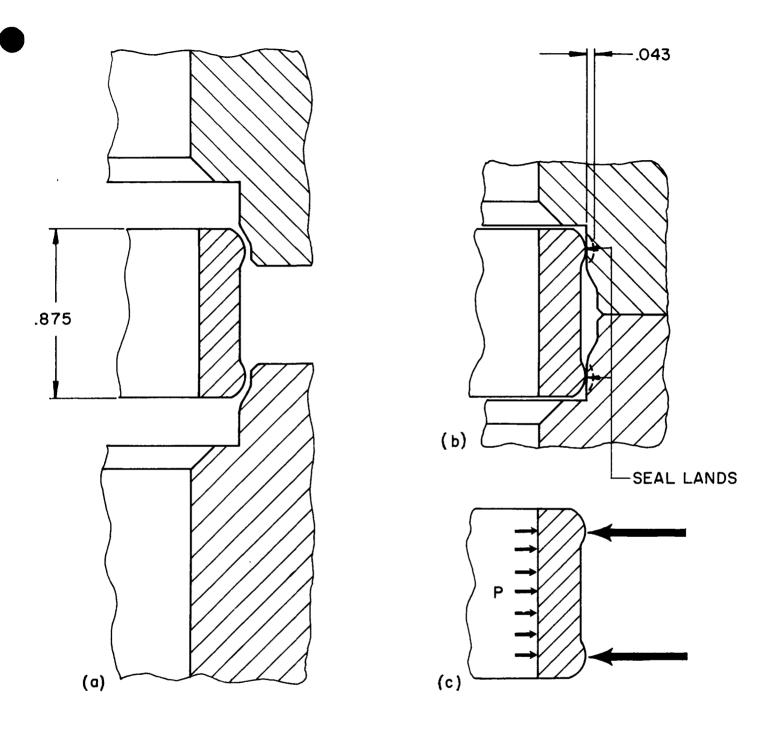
WAVE RING SEAL: (a) Positioned; (b) Assembled; (c) Pressurized
